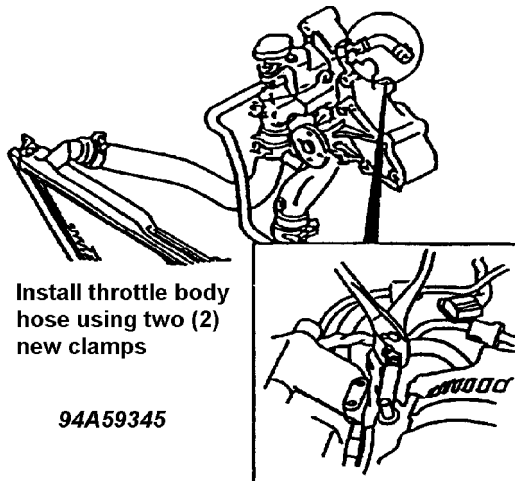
Installing Throttle Body Hose (N3A1-13-692A)
